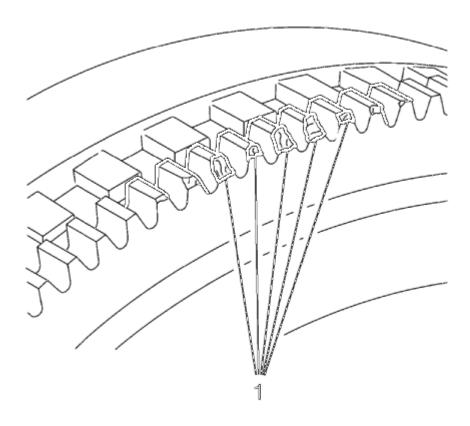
Toothed Ring Courtesy of GENERAL MOTORS COMPANY
